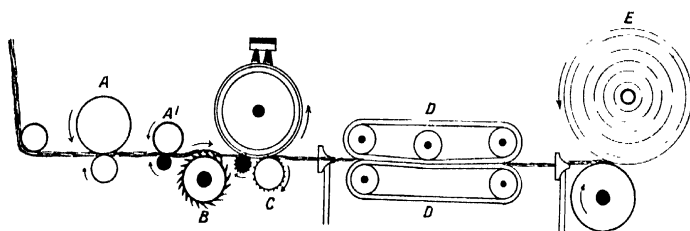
A.—Enlarged View of principal parts in a French Drawing-box.
